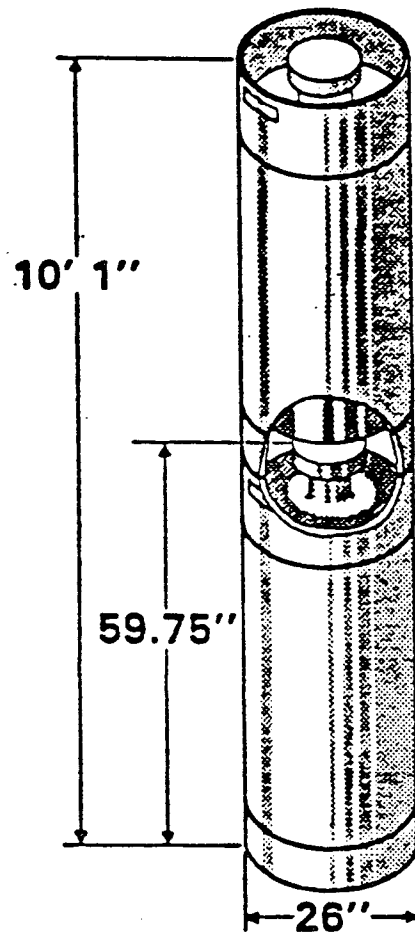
Stacked Remote Handled Waste Canister Assembly
